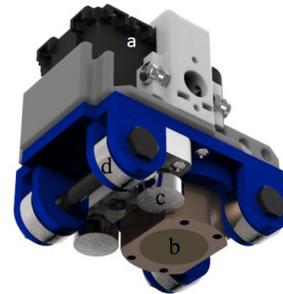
Adhesion unit: a- AX-12 actuator, b- switchable magnet, c- permanent magnet, d- bearing.
